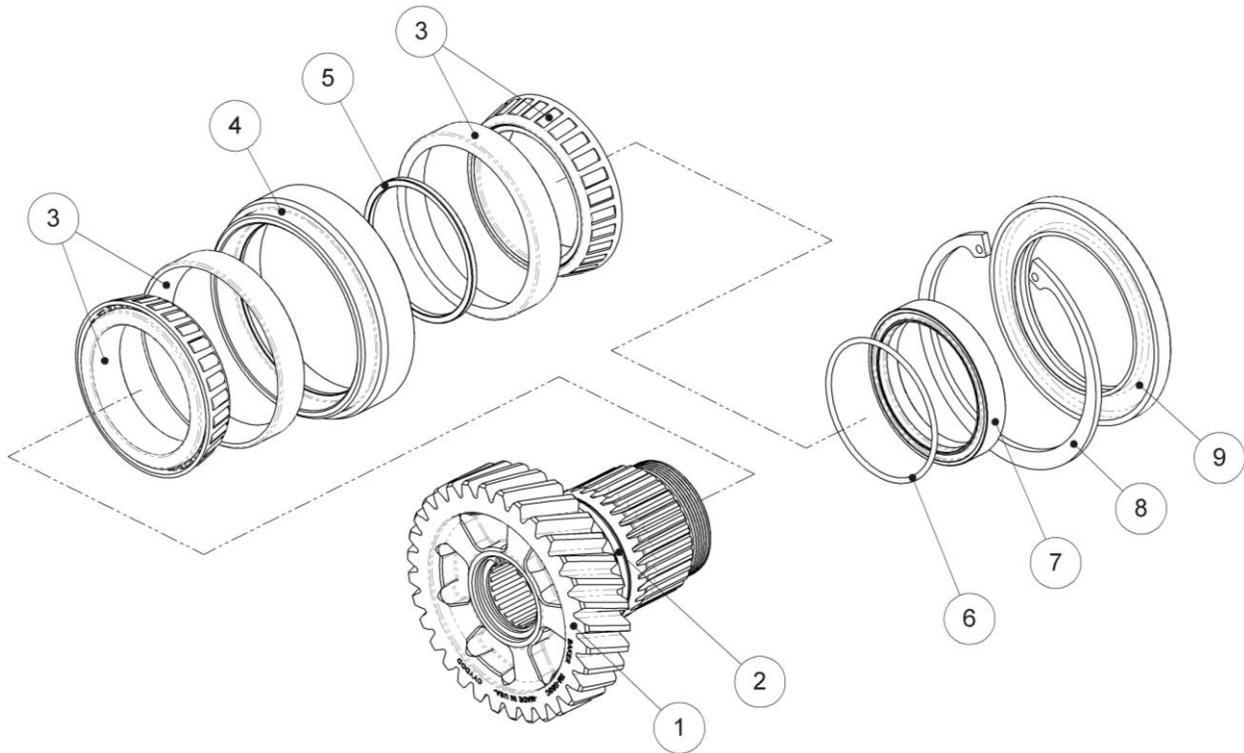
| EXPLODED VIEW, TAPERED ROLLER BEARING
